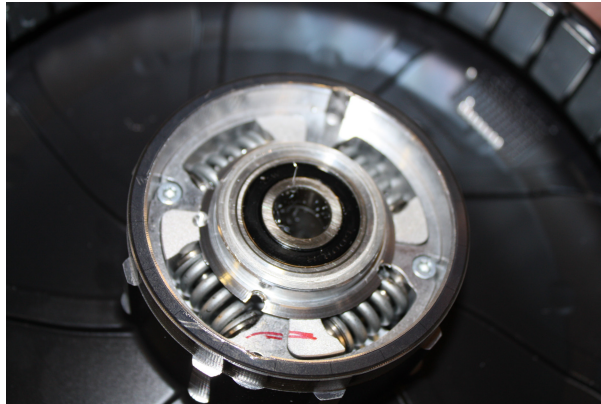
The inner part with the magnet ring removed to expose the mechanical springs that give a flexible coupling between the inner part and the rotor.
